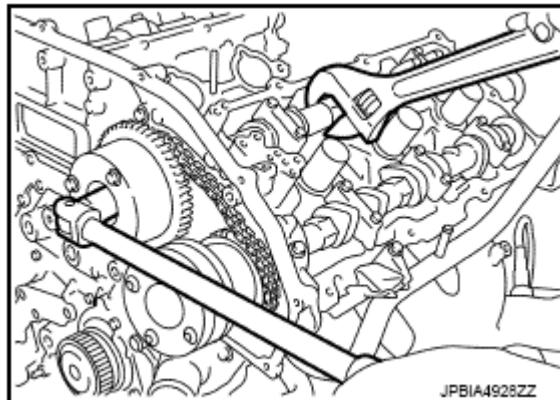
Removing Camshaft Sprocket Mounting Bolts
